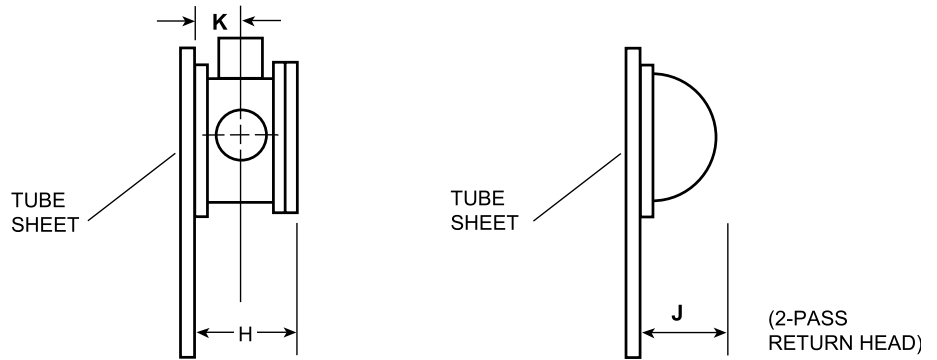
DIMENSIONS – EVAPORATOR NOZZLE ARRANGEMENTS - STANDARD (MM)
